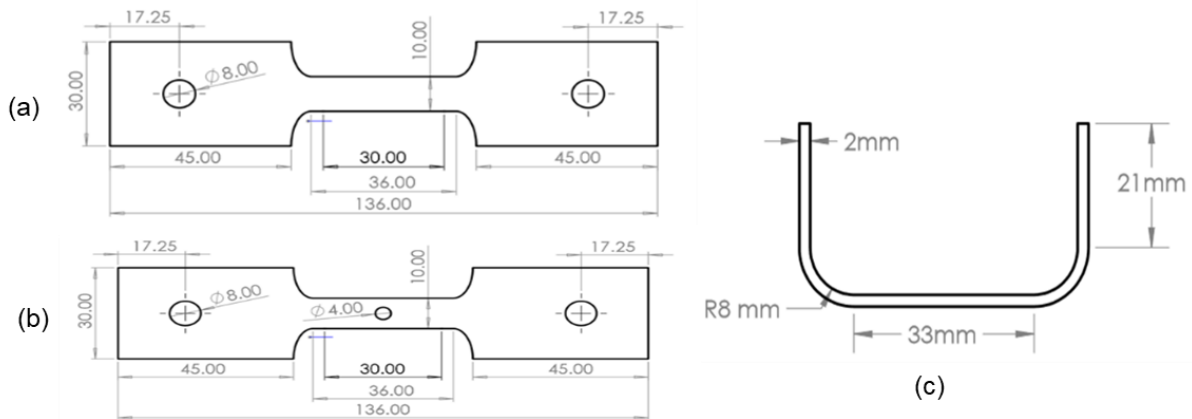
ILLUSTRATION OF THE THREE SELECTED SPECIMENS (A) TENSILE SPECIMEN WITHOUT HOLE (B) TENSILE SPECIMEN WITH HOLE (C) KS-8 SPECIMEN
